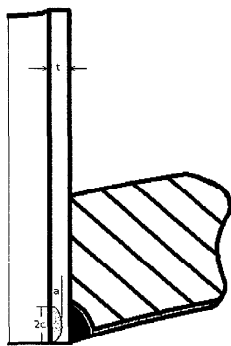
Inside, Axial Surface Flaws, At the Attachment Weld, Head Vent, Nozzle Downhill Side - Crack Growth Predictions
